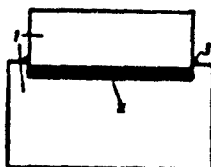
Schematic of joining blanks using soft iron powder: 1) Blanks being laminated; 2) interlayer of iron powder; 3) fillet weld after forging.
